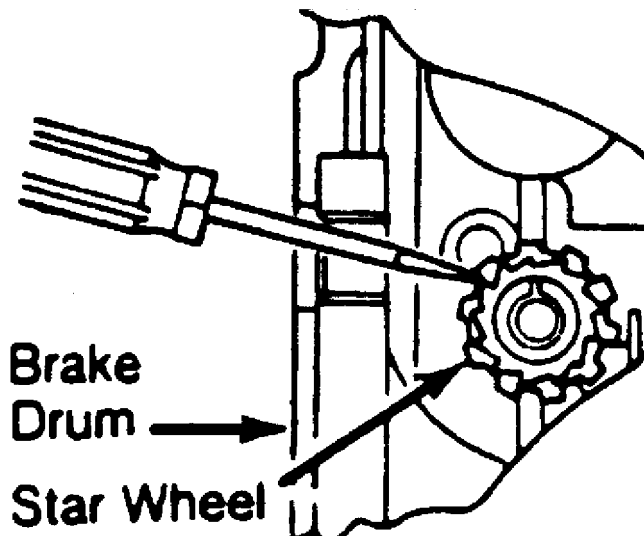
Adjusting Rear Brake Shoe-to-Drum Position
